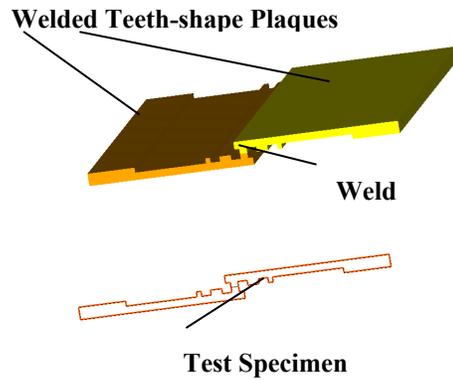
Model of welded shear / lap joint (consists from two teeth-shape injection molded plaques welded together. For teeth-element thickness of the weld beads are: 6; 4 and 2,5 mm)
